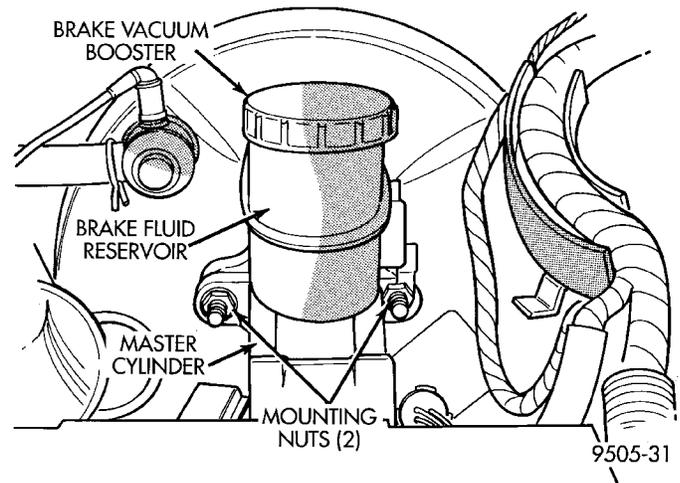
Master Cylinder Mounting To Vacuum Booster
